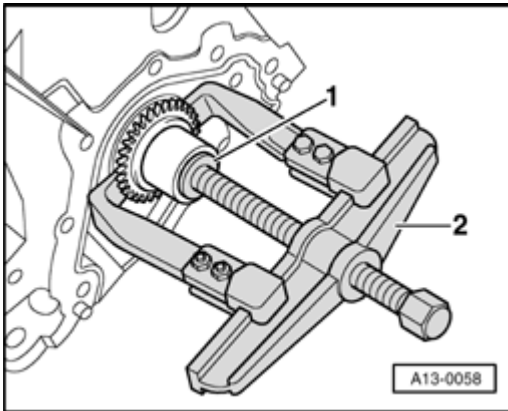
Pulling Off Chain Sprocket From Crankshaft
